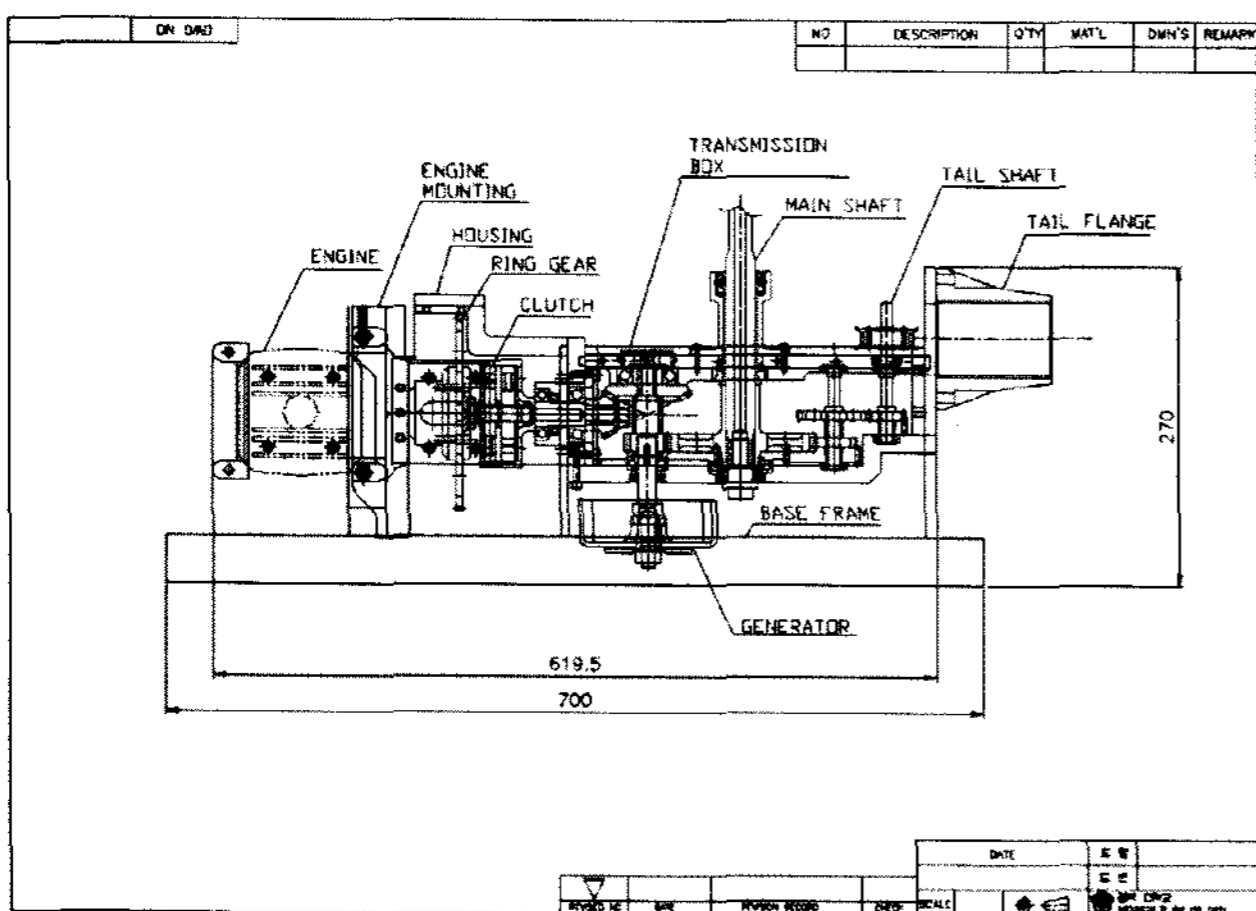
Assembly drawing of the designed power unit with a transmission.
